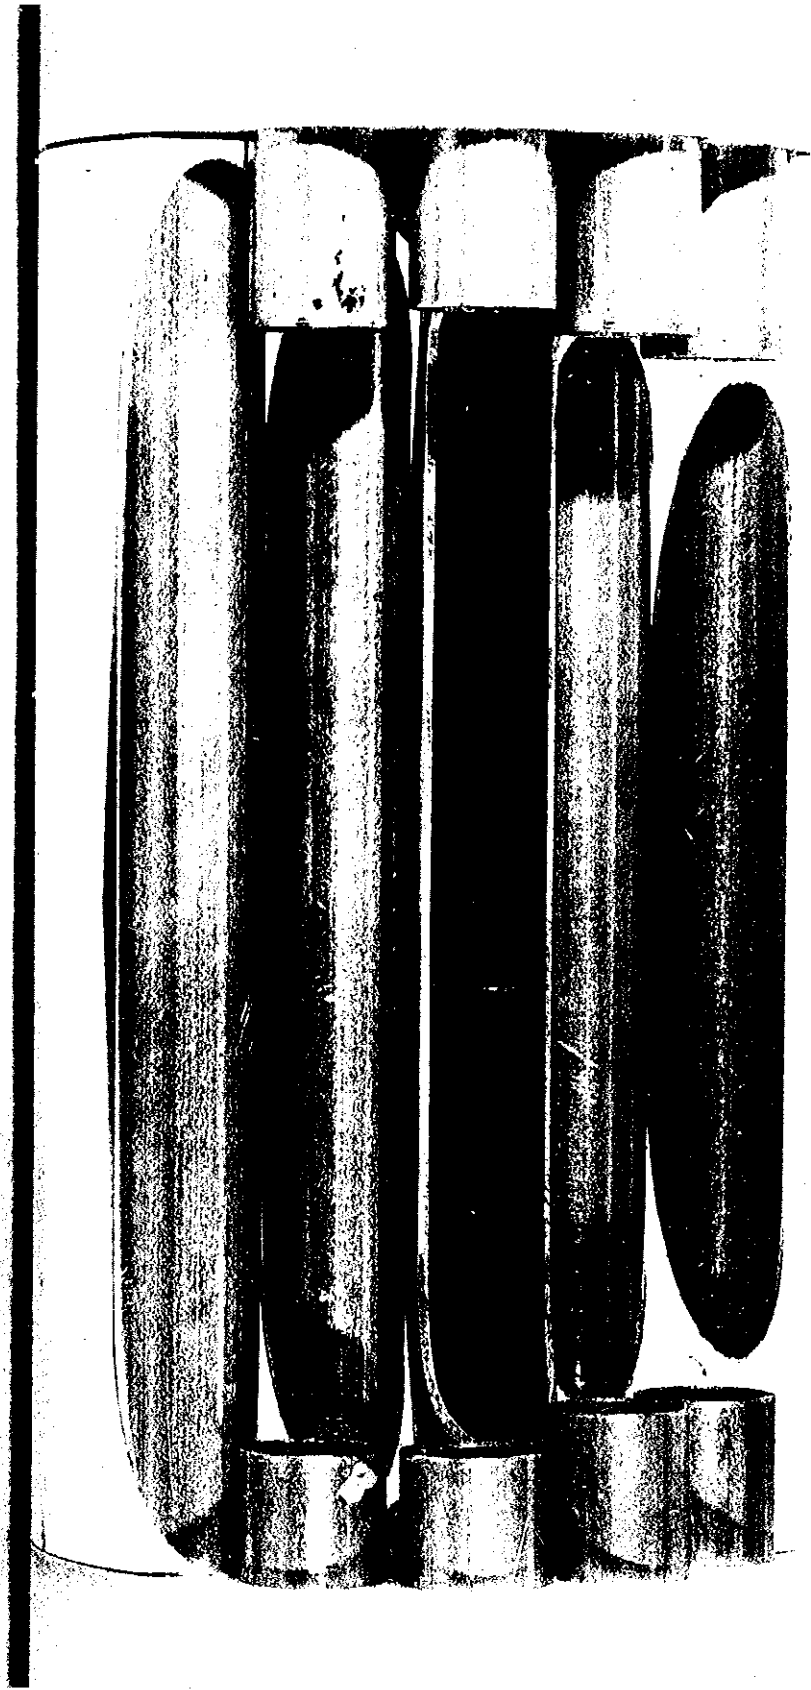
SECTION OF 19-ROD CLUSTER SHOWING FOIL PACKET
